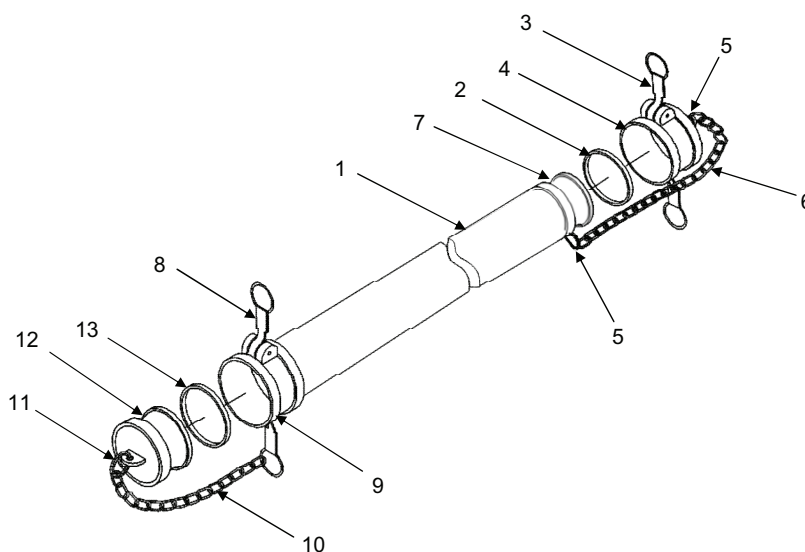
Berm Liner Drain Hose Assembly, Cam x Cam.
